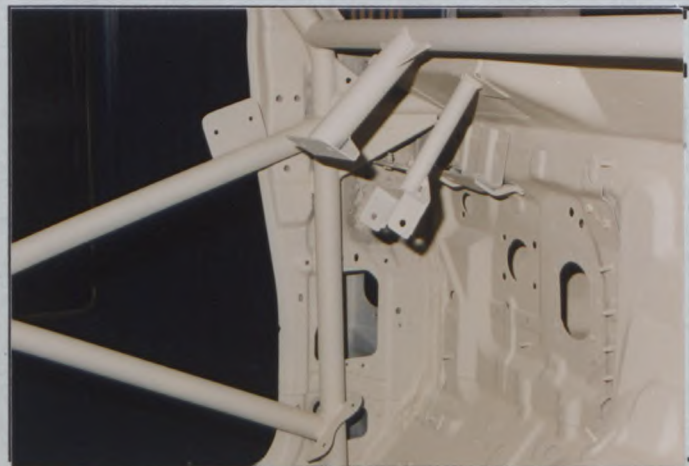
REAR SUPPORT BAR TO FLOOR
